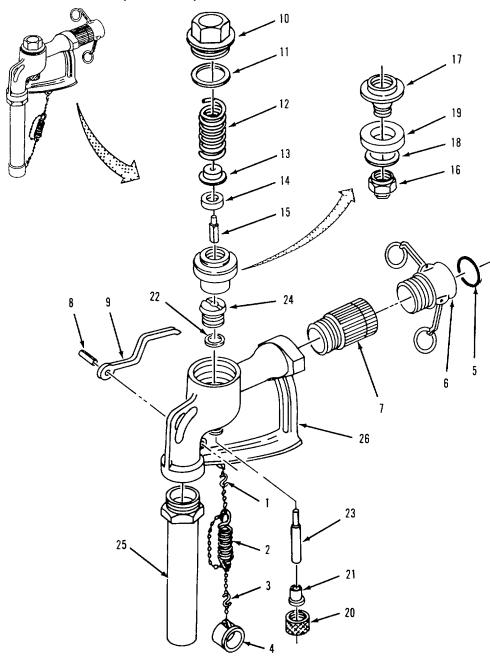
Distribution Nozzle (1-1/2 Inch) Disassembly.
